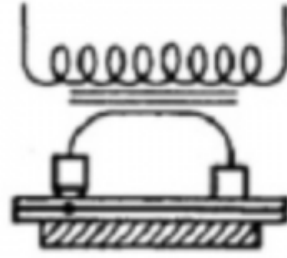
Schematic layout for indirect welding [7].
